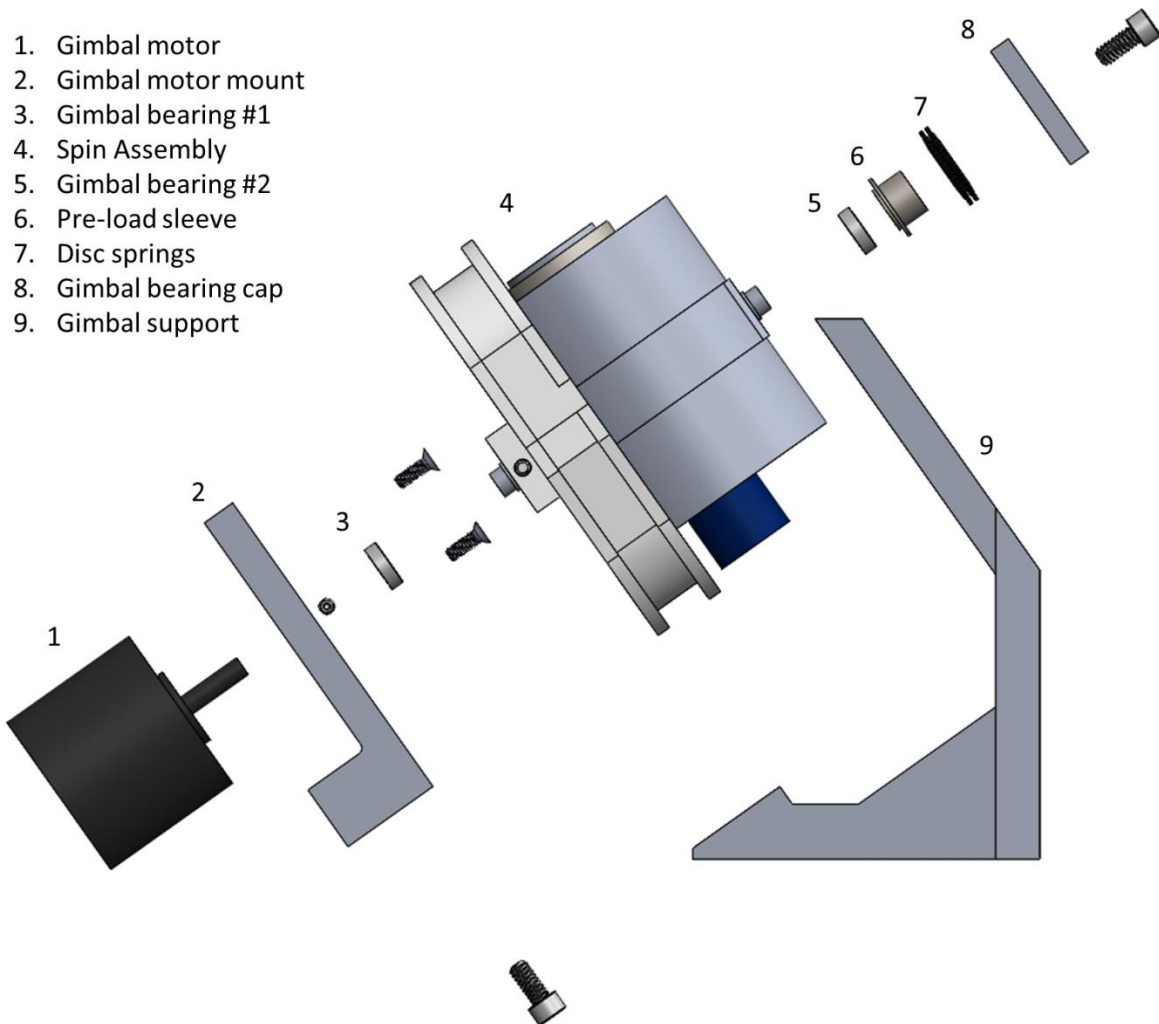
The exploded view of the gimbal assembly shows how it goes together. The gimbal motor is attached to the motor mount and then to the spin assembly with a bearing. The motor mount is attached to the gimbal support and then the second bearing is put in place and pre-loaded.
